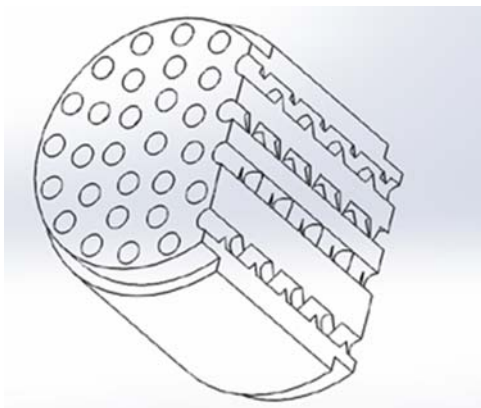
Cross-sectional CAD view showing the internal pattern of channel.
